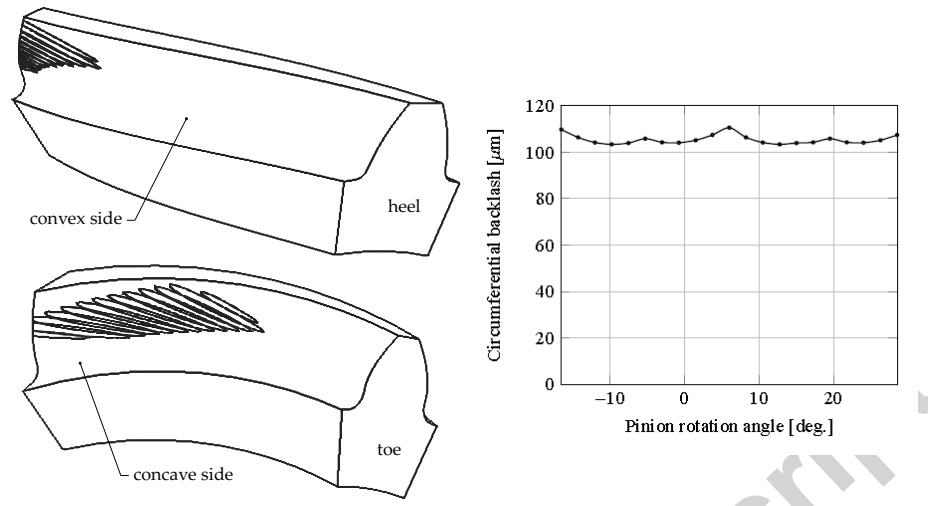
Contact pattern on both sides of pinion tooth and backlash evolution for an aligned gear drive with adjusted bearing contact and errors compensation.
